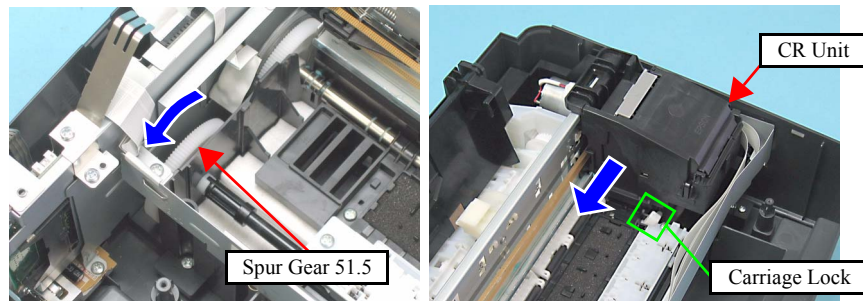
Unlocking the Carriage and Moving the CR Unit
